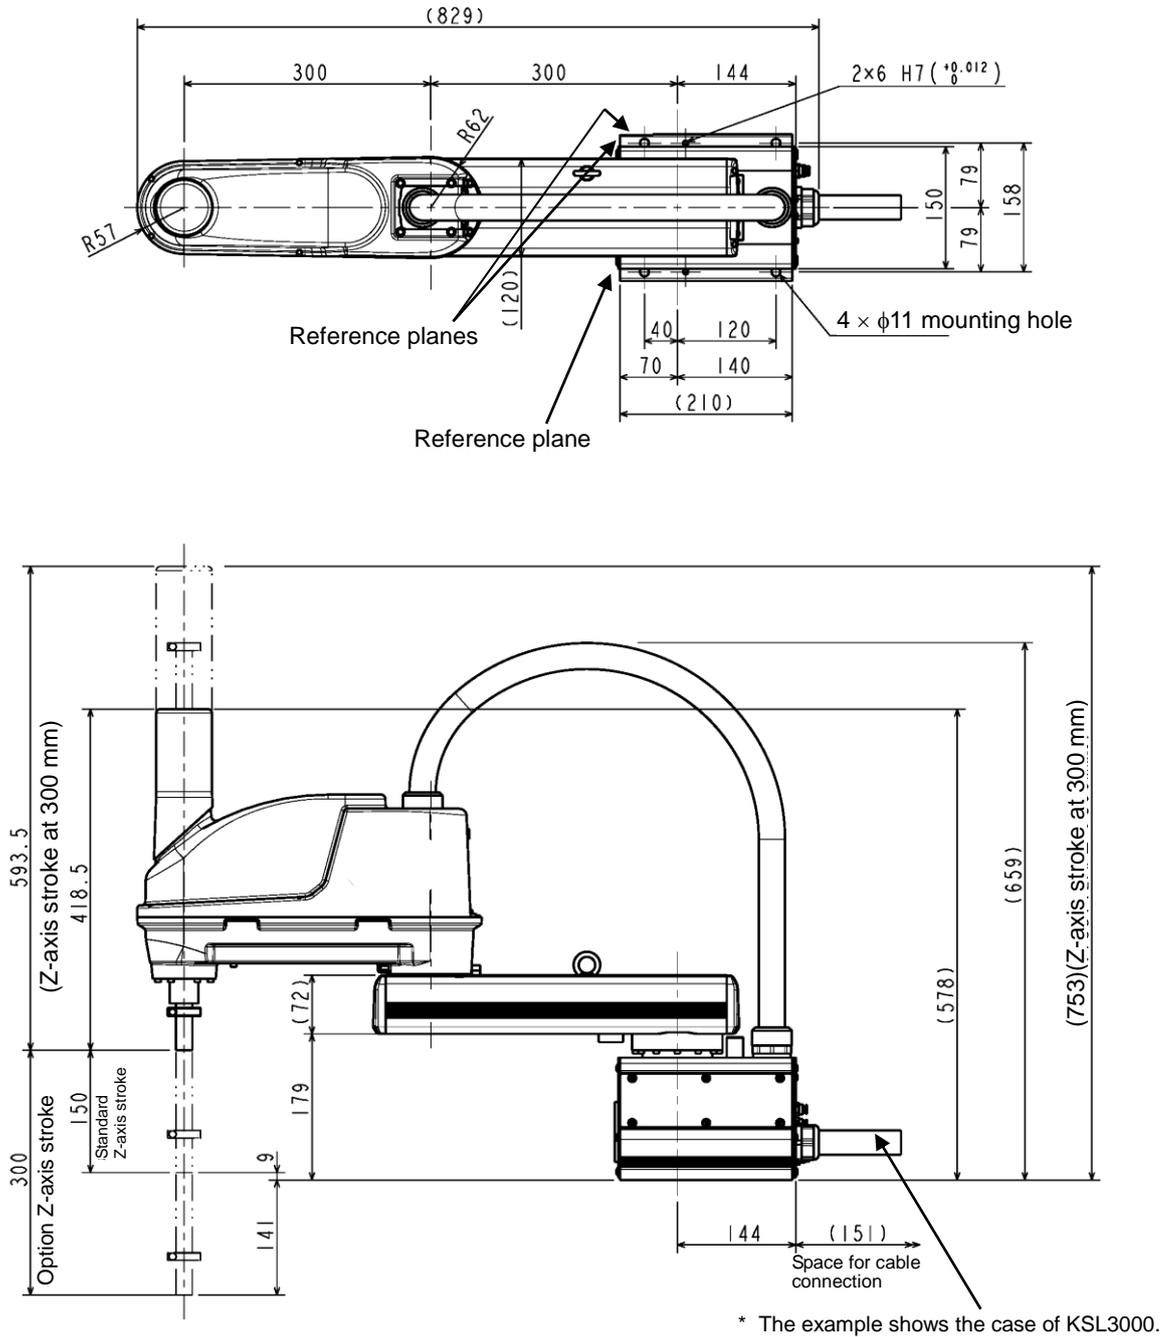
Outer dimensions of the robot (KHL-600NSCN)
